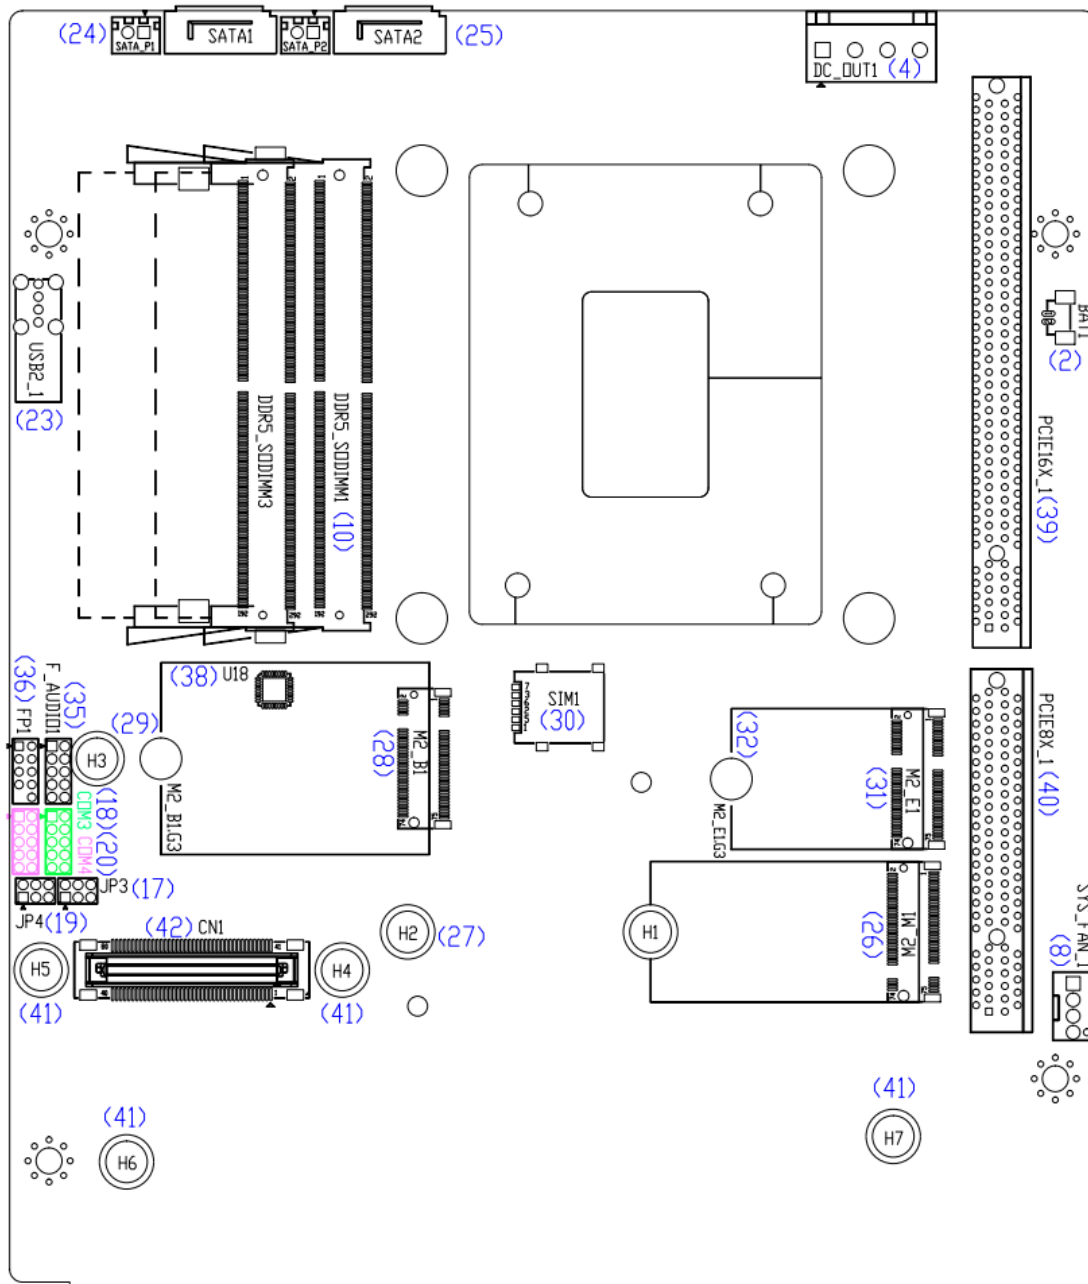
Jumpers and Connectors Location- Board Bottom
